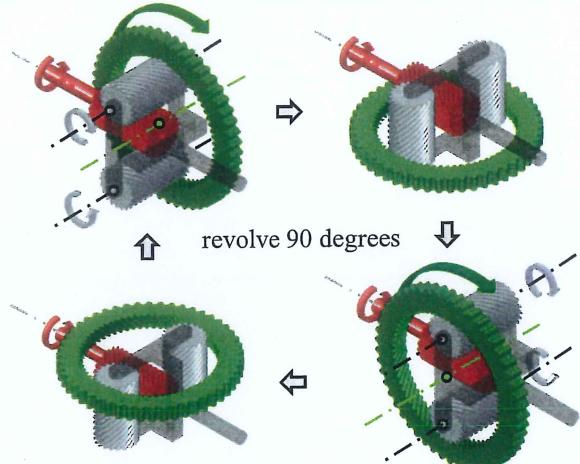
Principle of the Eccentric Planetary Gear Mechanism
